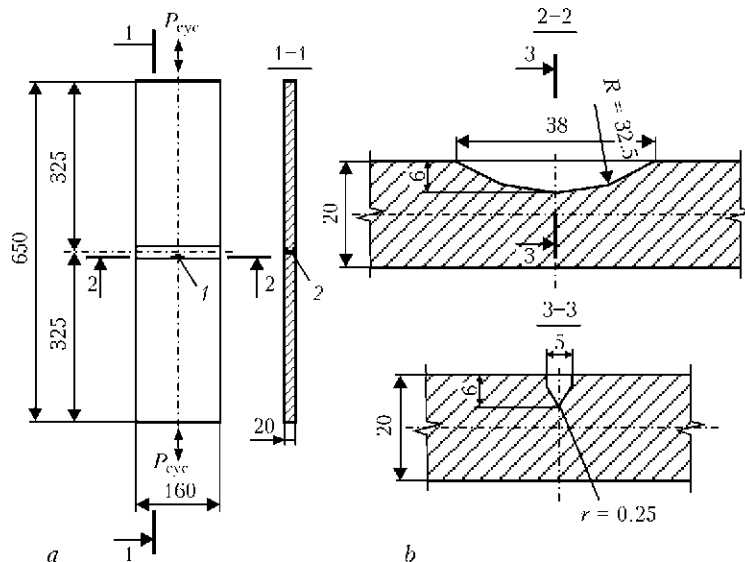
Schematic (a) and dimensions (b) of specimen of 06GB steel welded joints for cyclic crack resistance testing: 1 – notch along the fusion line in HAZ; 2 – weld reinforcement removed from two sides
